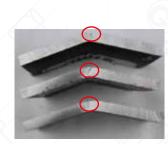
Side view of the three samples from the original equipment manufacturer after the bending test. Cracks visible on all samples.
